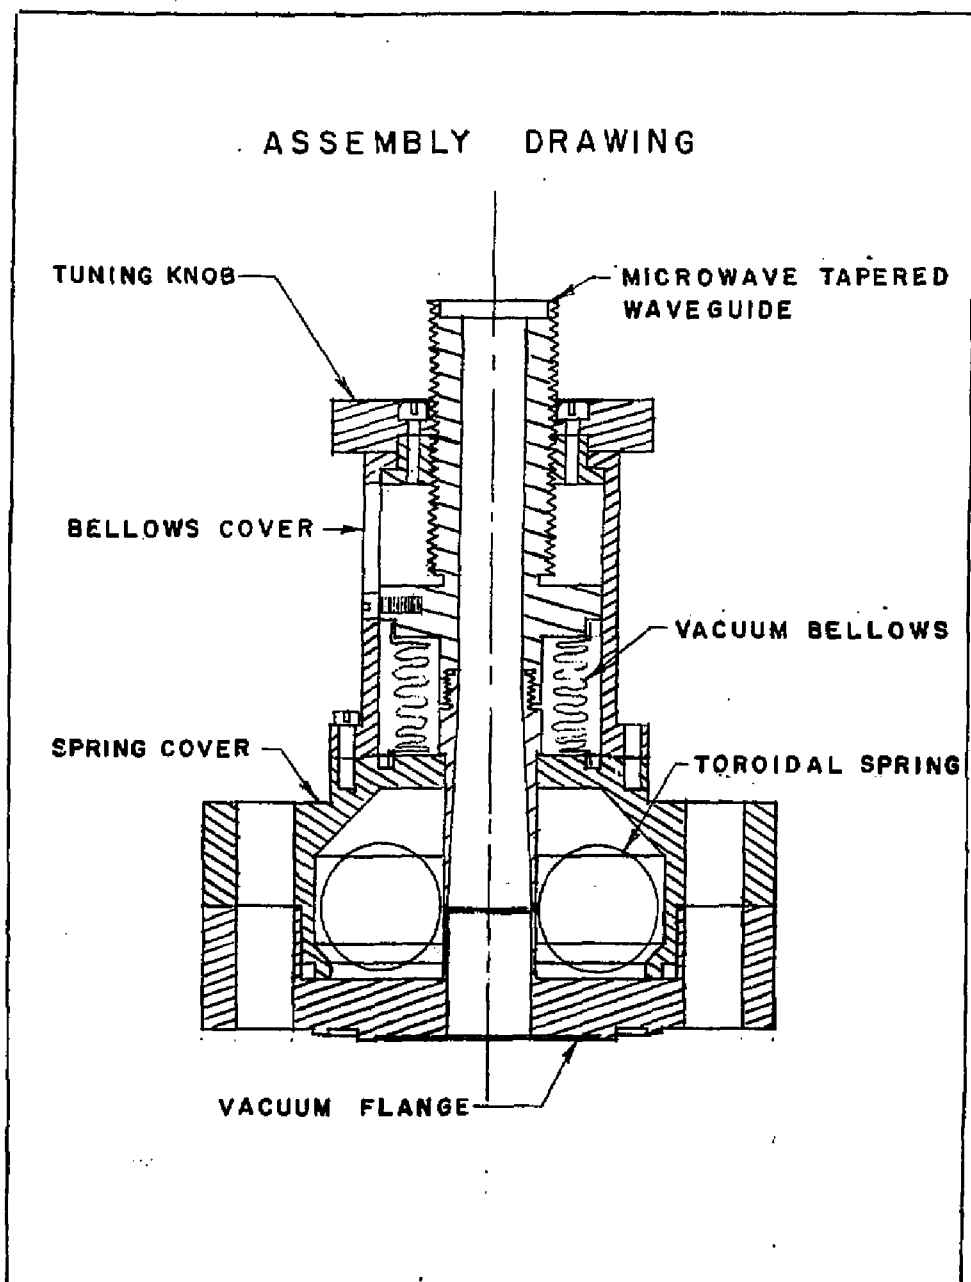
Cross-sectional View of the Assembled Vacuum Window
